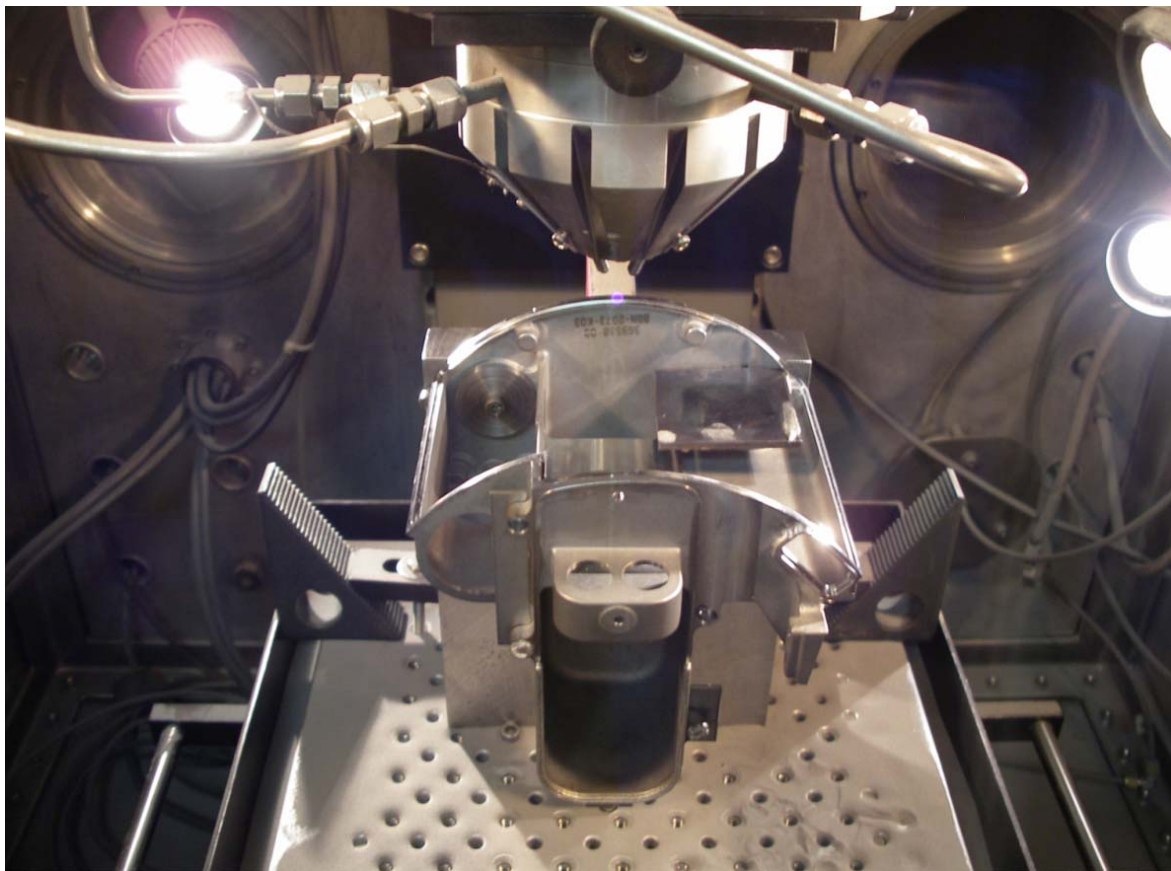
The W87 Firing Set Housing in the LENS Machine for Repair of the Cover Weld Flange.
